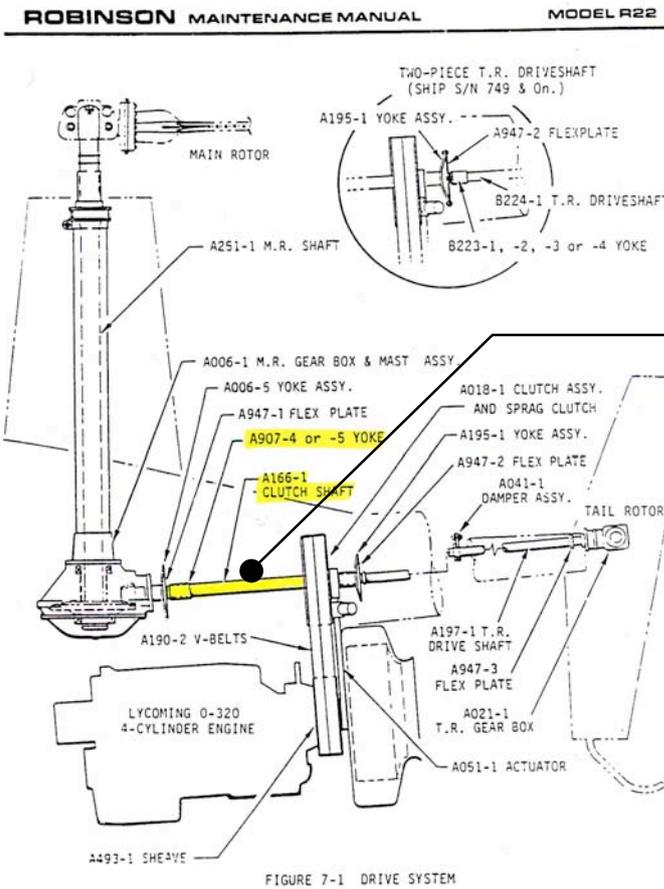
Clutch shaft, yoke and bolting arrangement (highlighted)
